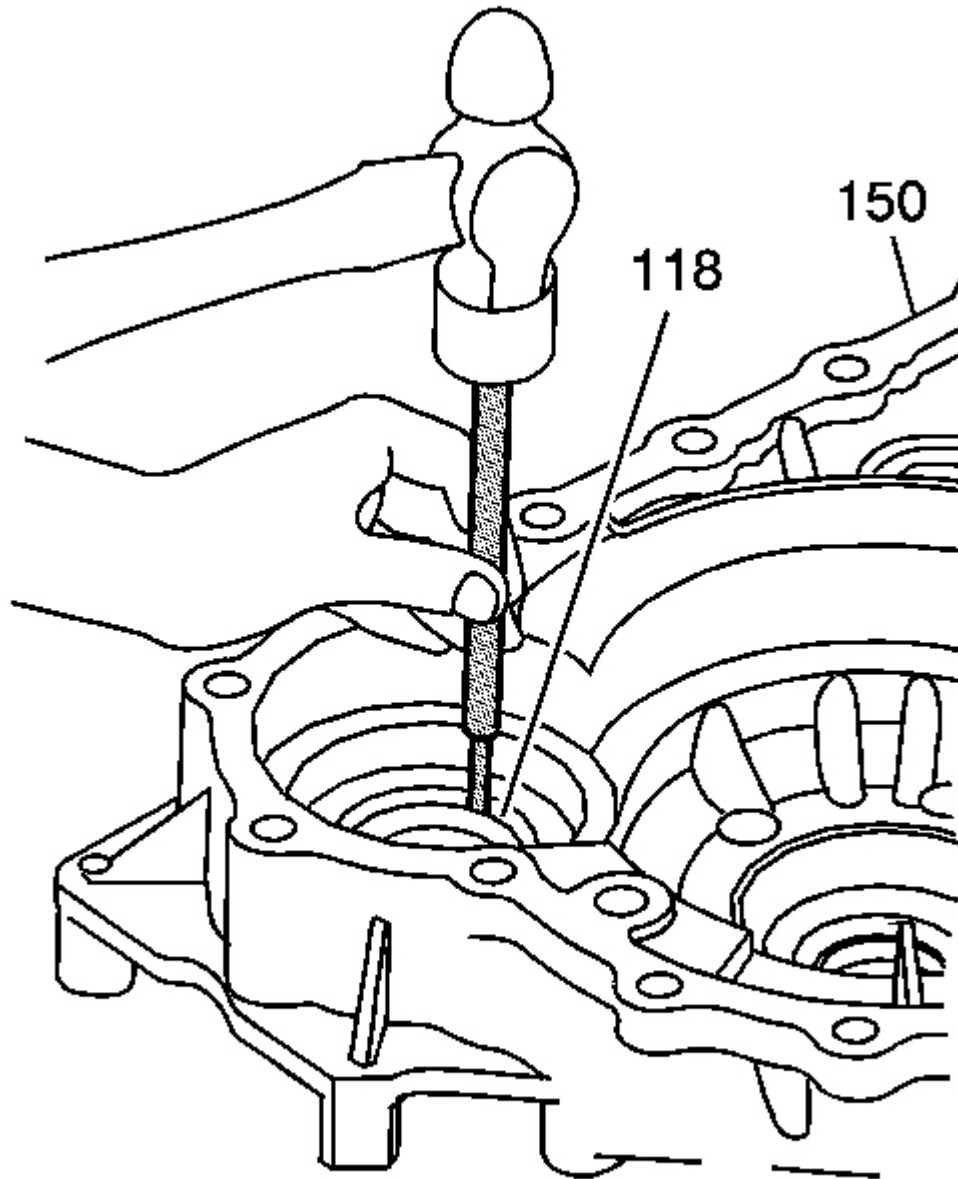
Removing Transfer Case Input Shaft Seal From Torque Converter Housing Using A Hammer & Punch
